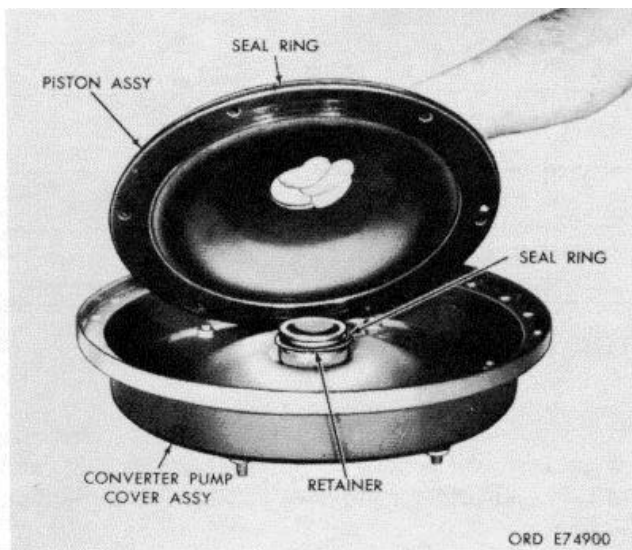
Removing (or installing lockup clutch piston assembly).
